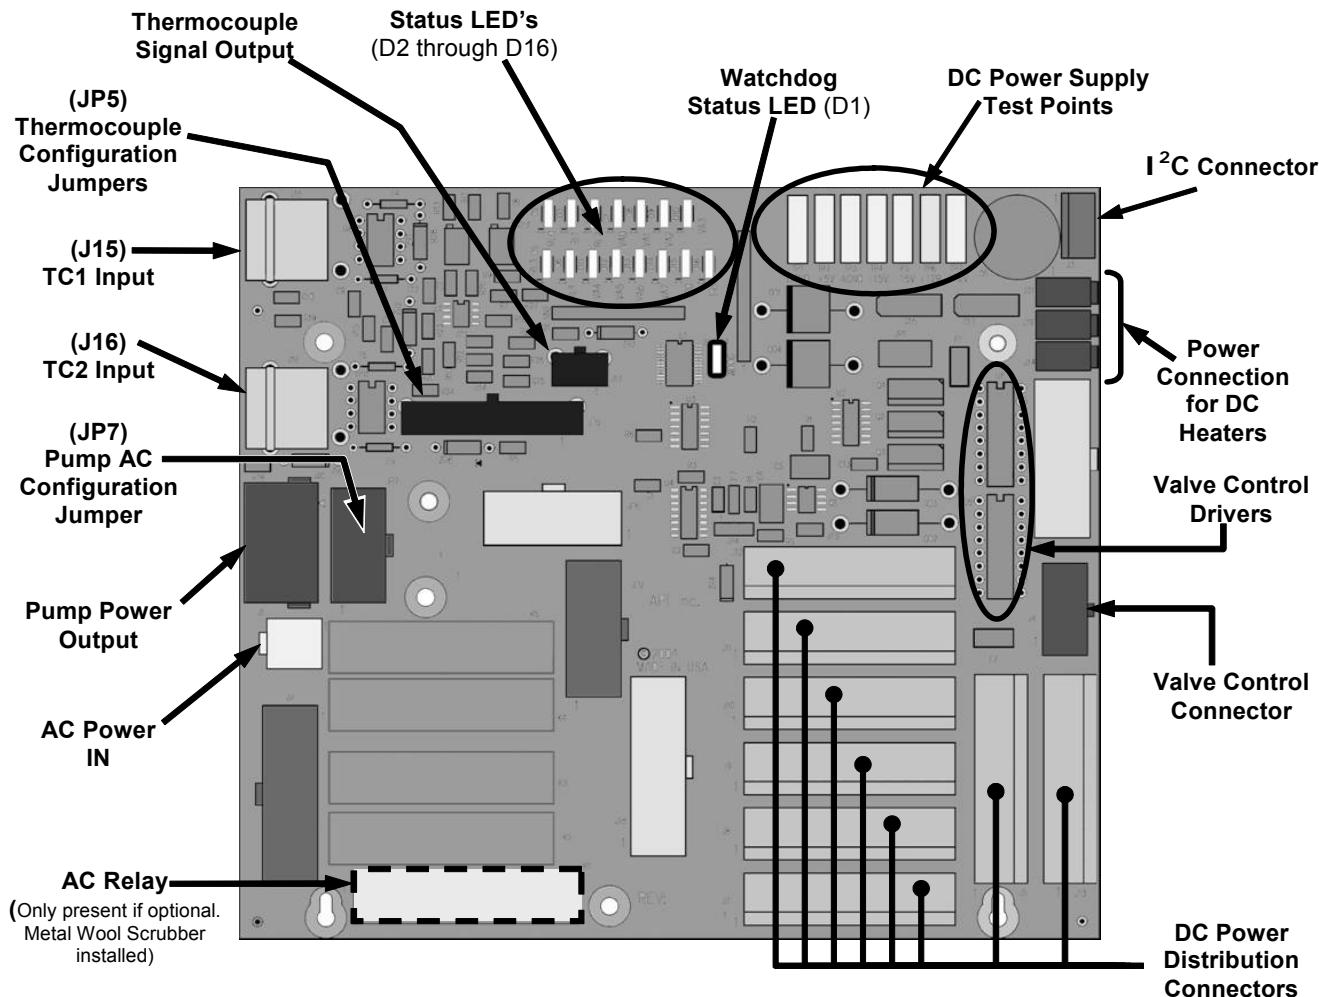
Relay PCA Layout (P/N 04523-0100)
